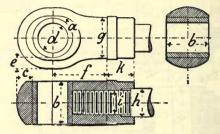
Valve Rod-End for Corliss Valves.
